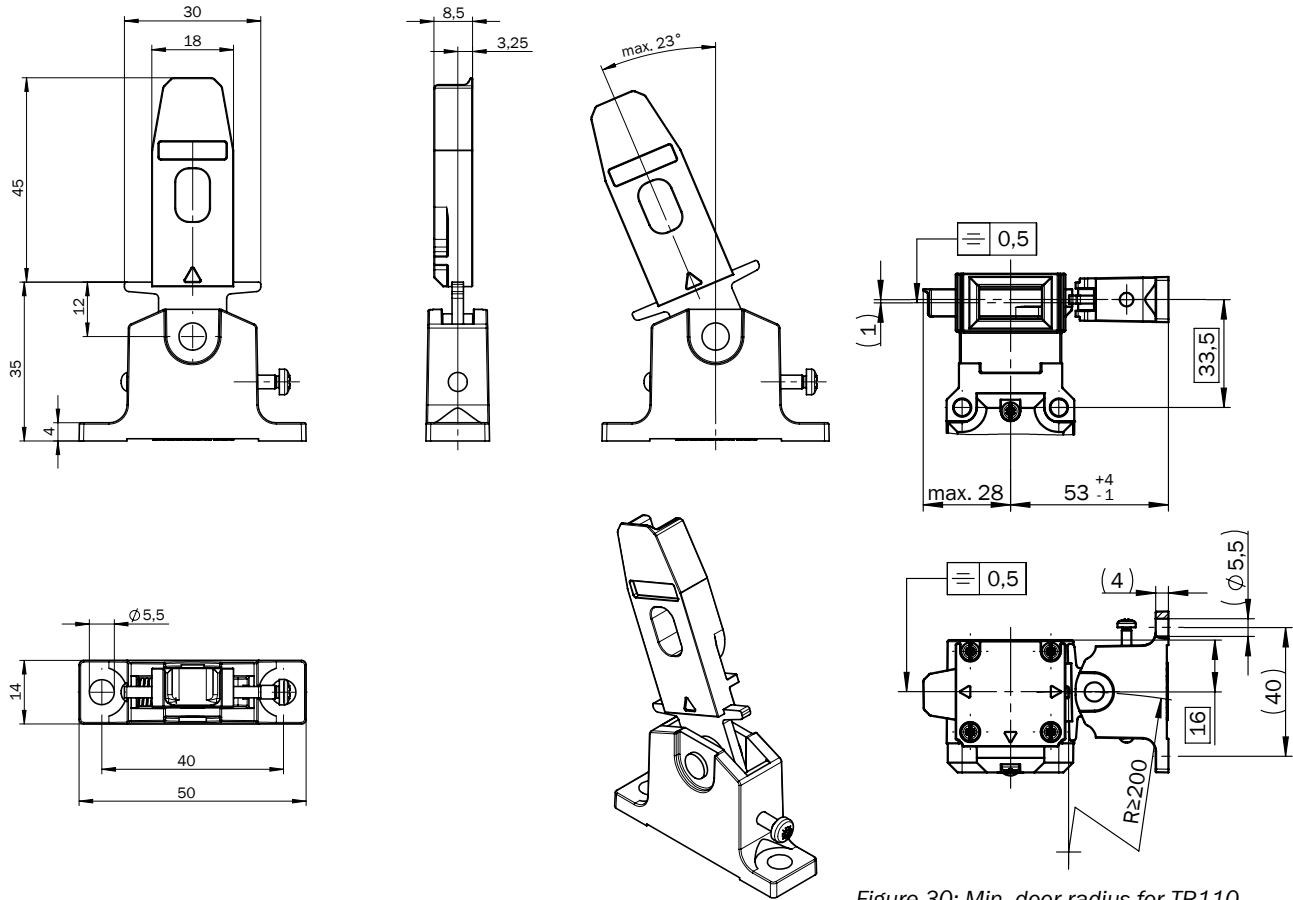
Dimensional drawing of TR110-XAFL hinged actuator (mm)
